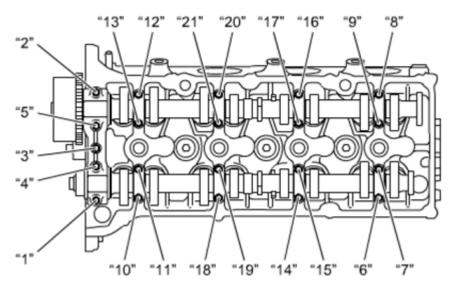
Identifying Camshaft Housing Bolts Tightening Sequence Courtesy of SUZUKI OF AMERICA CORP.
